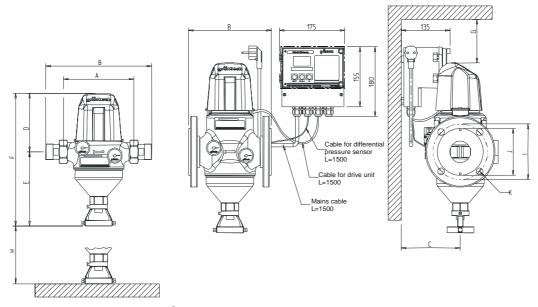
Dimensional drawing of GENO® backwash filter MXA
